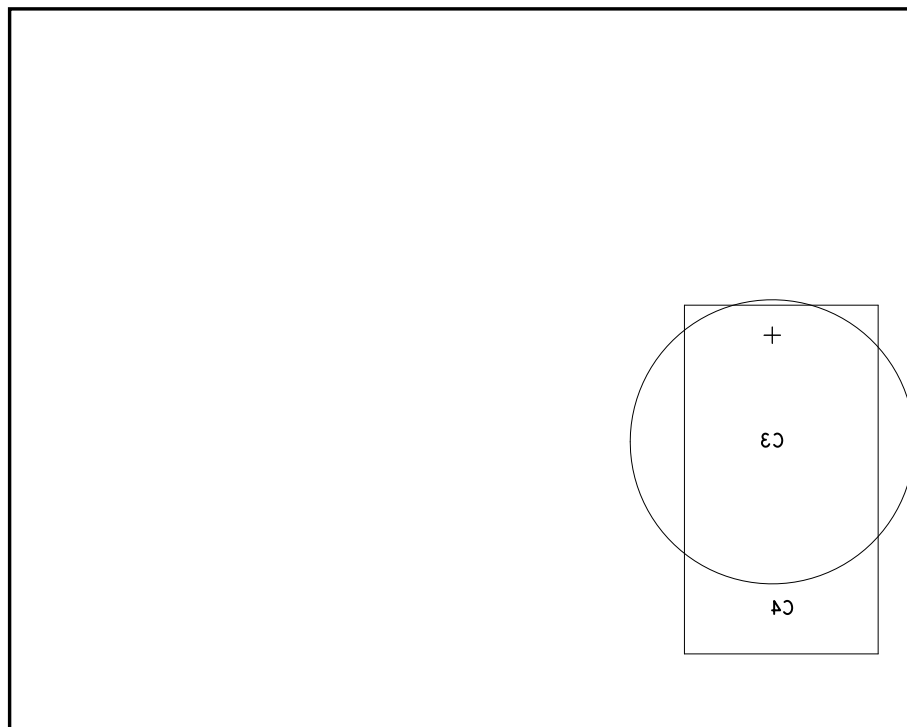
EVLSTDRIVEG611 - layout (top layer)
